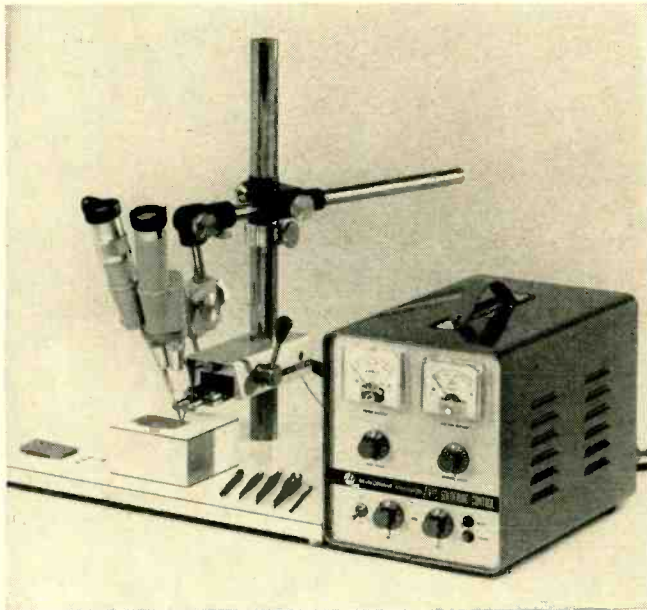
Resistance soldering fixture allows control of both heating and cooling times. The microscope aids in positioning.
